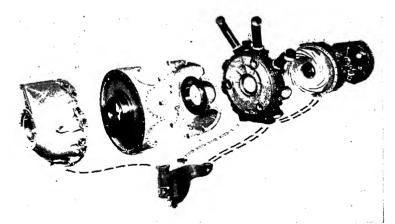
Exploded view of Wright cyclone G-200 engine crankcase sections showing details of the steel main section.
